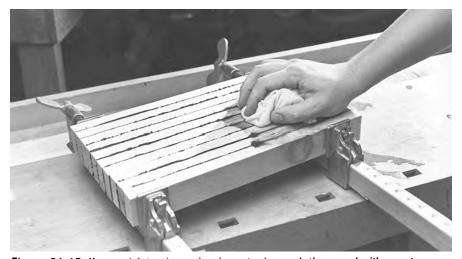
If you wish to plane glued-up stock, scrub the wood with a wet rag while the glue is still wet. Be sure to remove all the glue on the surface of the stock. If any surface glue remains after the glue dries, remove it with a scraper or a belt sander. Warning: Allow the glued-up stock to dry at least 24 hours before planing it.
